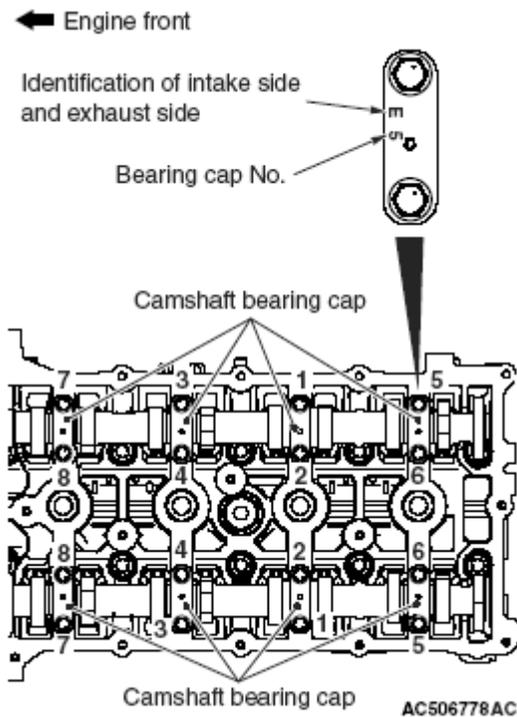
Identifying Camshaft Bearing Caps To Cylinder Heads
